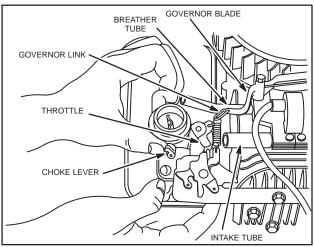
INSTALL CARBURETOR AND TANK ASSEMBLY
